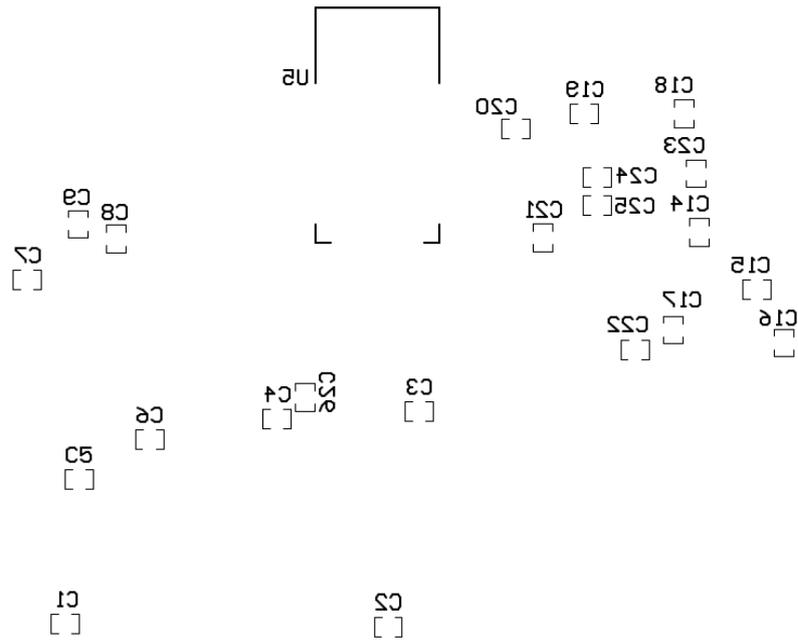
PCB layout-2: Bottom overlay of the design.
